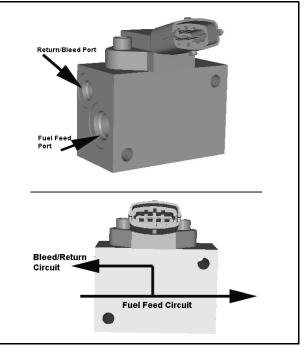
Gasoline Fuel Pressure and Temperature Manifold Assembly
